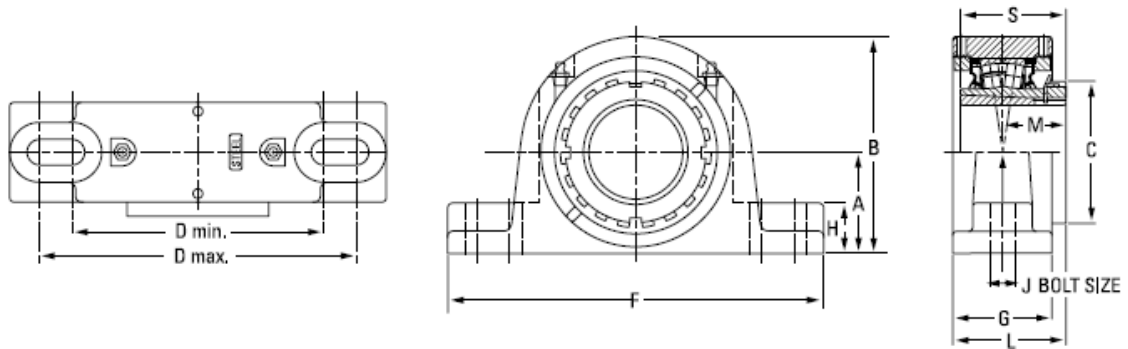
Dimensions of the TIMKEN TAPN28K125S bearing assembly
